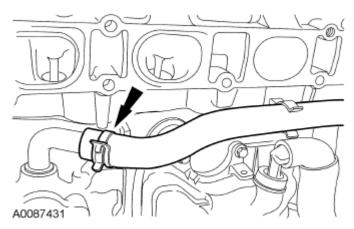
Locating Coolant Hose Courtesy of FORD MOTOR CO.
